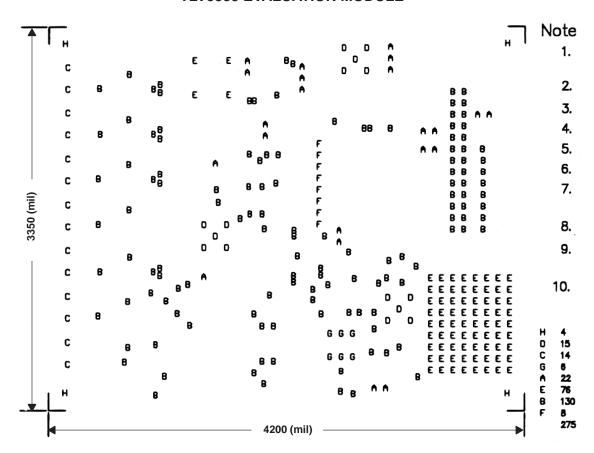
EVM Board Layout, Drill Drawing for Through Hole
